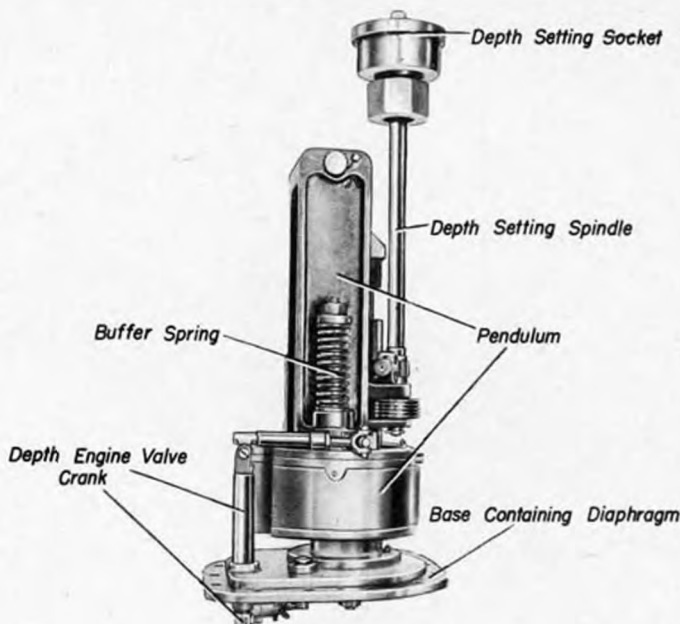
Torpedo Type 91 Mod I, Depth Mechanism
